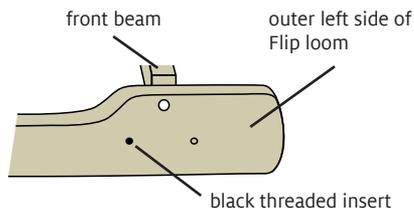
CHECK FOR BLACK THREADED INSERT
